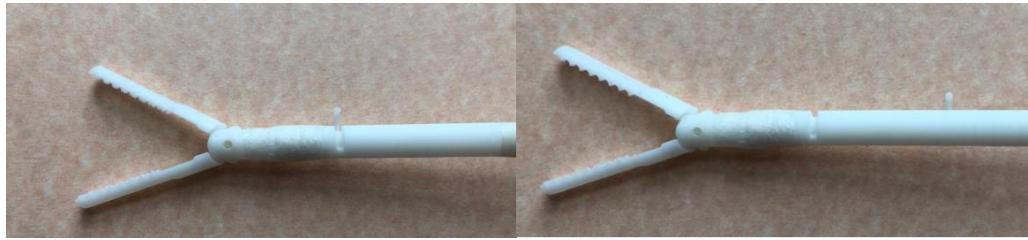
Extruding and sliding the hook feature of 2nd prototype
